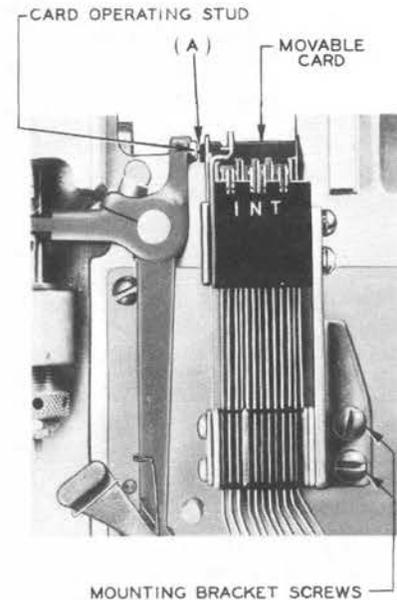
Clearance Between Movable Card and Card Operating Stud
